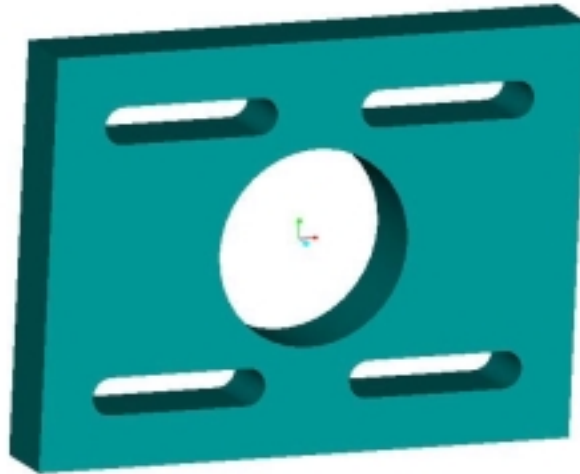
Bearing Block to Allow Compound Shaft to Tension Chain
